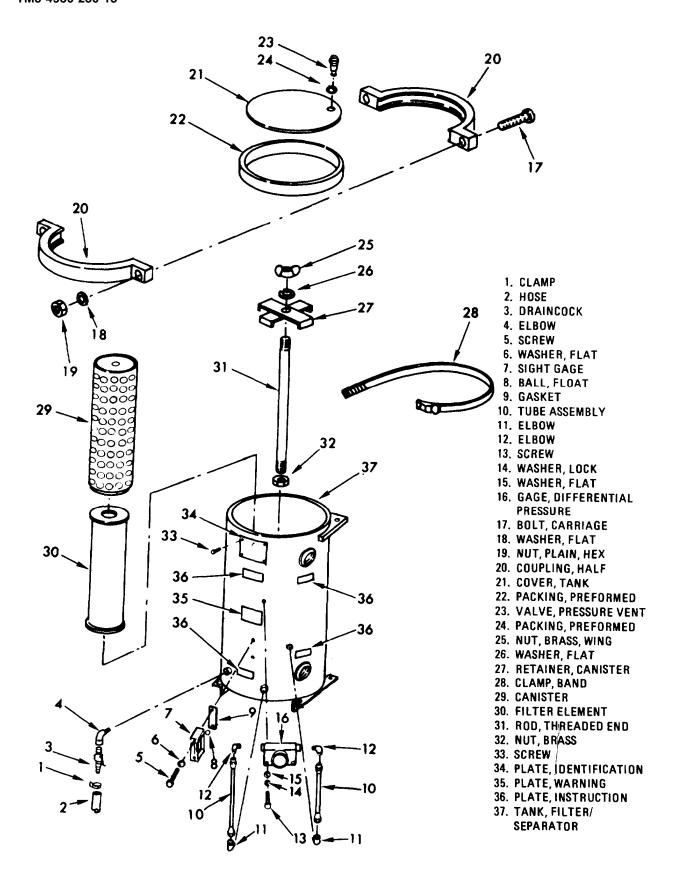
Filter/Separator, Disassembly and Reassembly.
